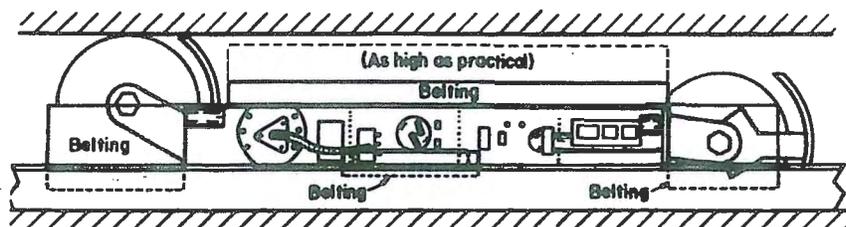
Conveyor belt screens mounted on the body of a double-drum shearer.
